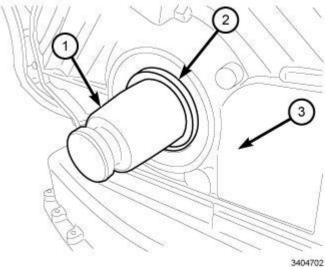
Front Seal Guide & Oil Seal Courtesy of CHRYSLER GROUP, LLC
